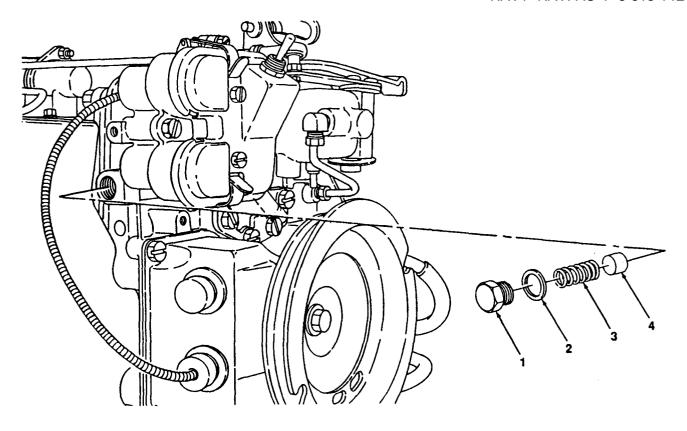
Oil Pressure Regulating Valve Assembly, Replacement.
